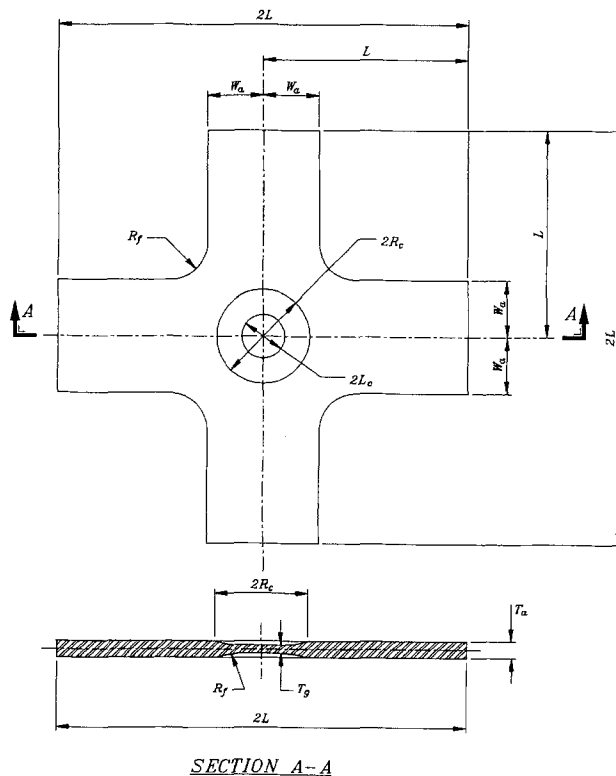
(a)—Typical cruciform specimen with a circular reduced central section
